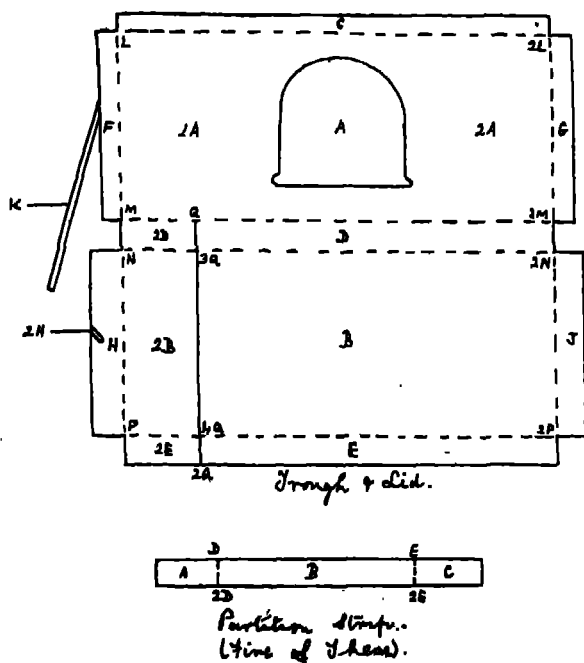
SIX-PIECE PARTITIONED EXAMPLE FOR POCKET TOILET OUTFITS.
